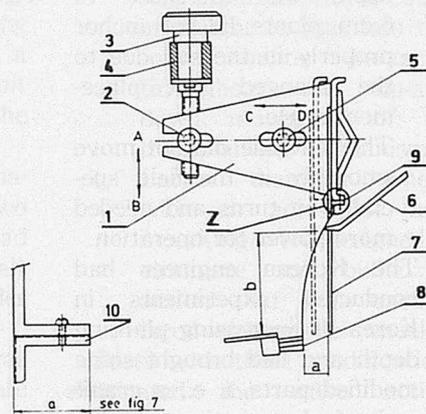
1-Installation Plate, 2-Adjusting Nut, 3-Adjusting Nut, 4-Bush, 5-Adjusting Bolt, 6-Setting Finger, 7-Comb Wire, 8-Brush, 9-Comb Wire Frame, 10-Seedling Box Wire Comb Reinforcing Plate
